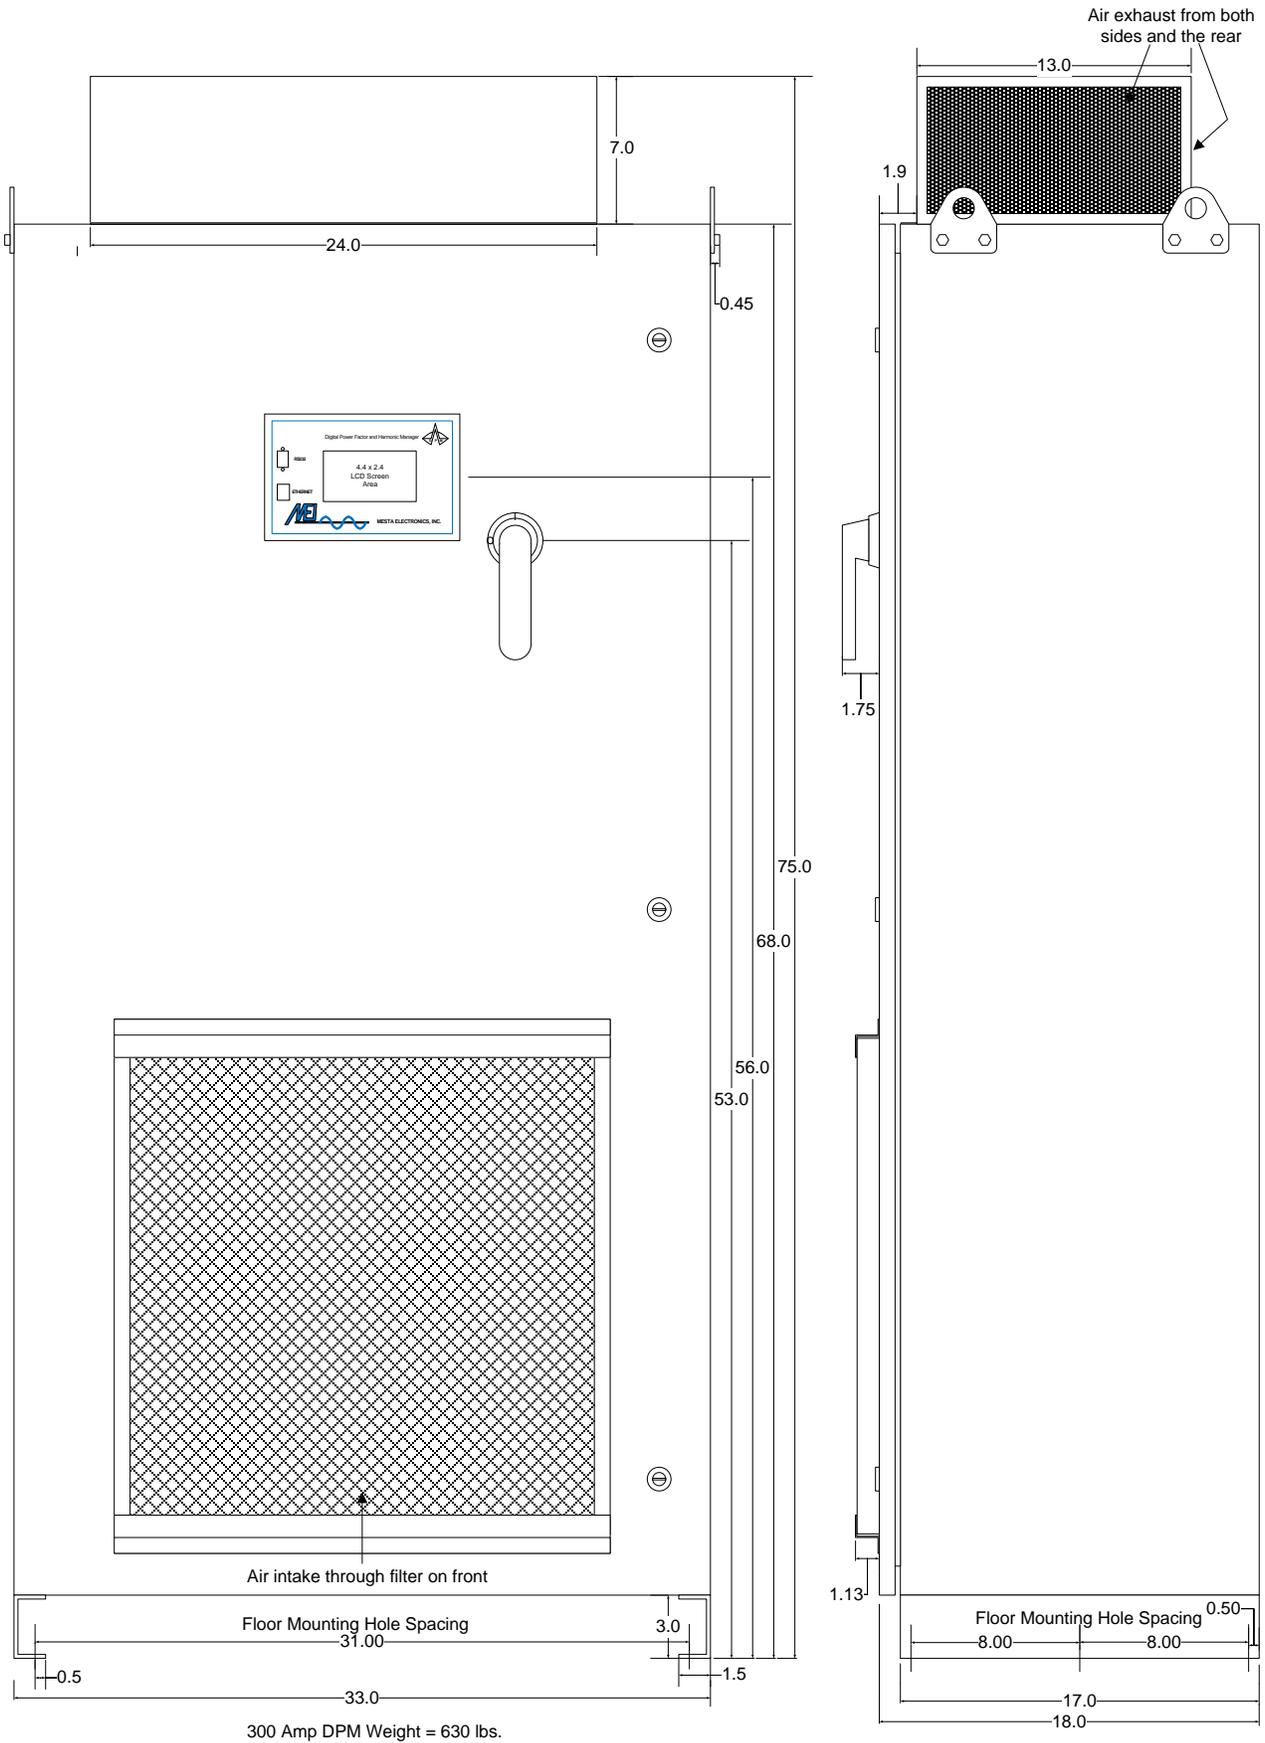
300 Amp DPM Panel Layout Drawings
